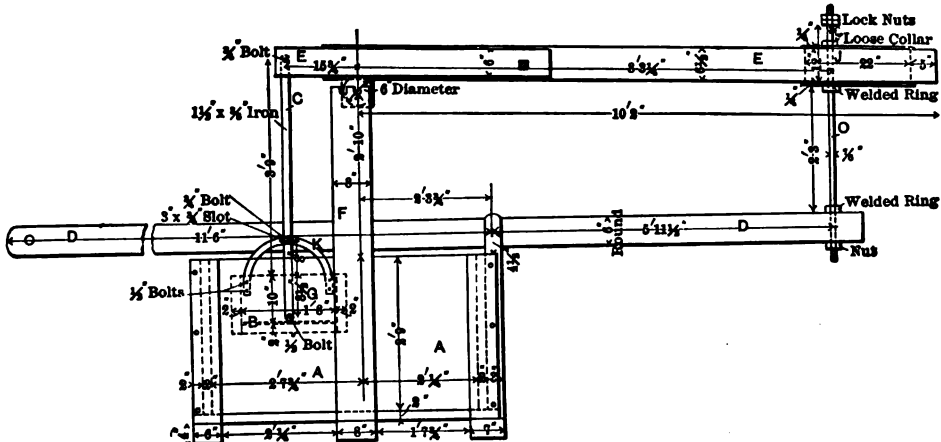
ELEVATION OF HAND JIG AT MILL 1.
